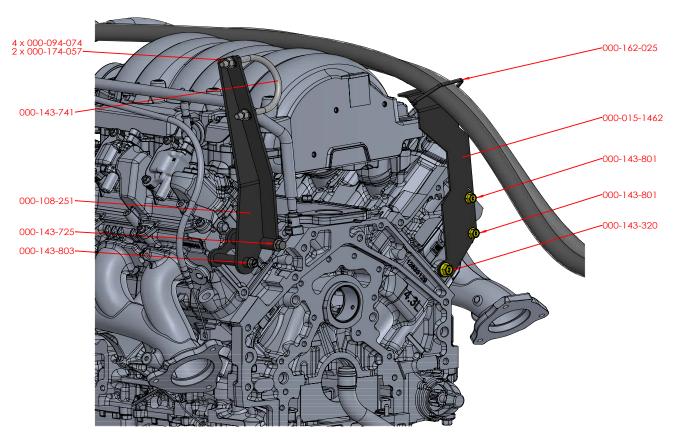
FRONT END FLY STRAP PROTECTOR AND COOLANT HOSE SUPPORT BRACKET ASSEMBLY
